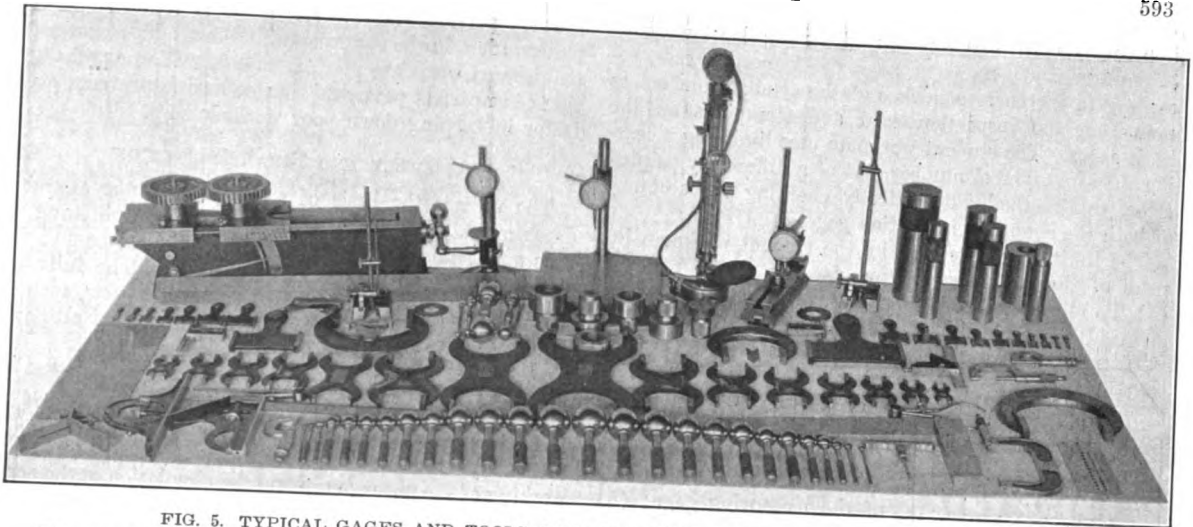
TYPICAL GAGES AND TOOLS USED FOR INSPECTING THE STANDARD PARTS
